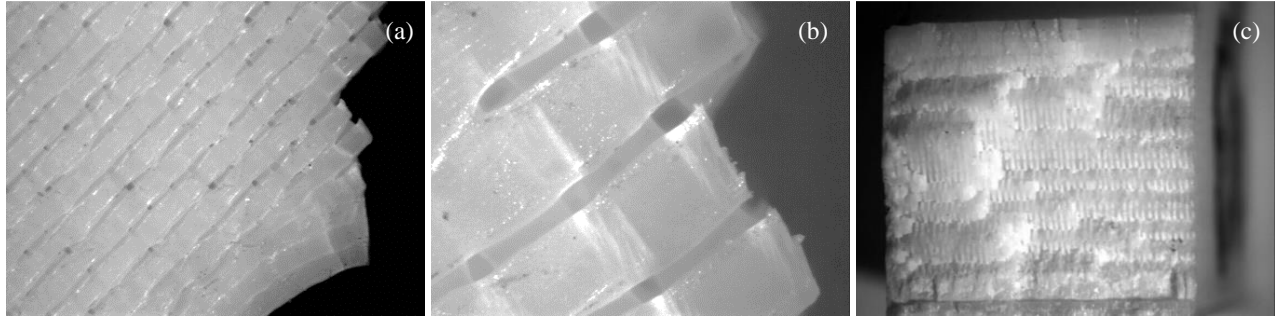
Observed defects: (a) inaccuracy on temperature of deposition; 12 \times ; (b) detail of the fracture, 50 \times ; (c) fracture surface, 6 \times .
